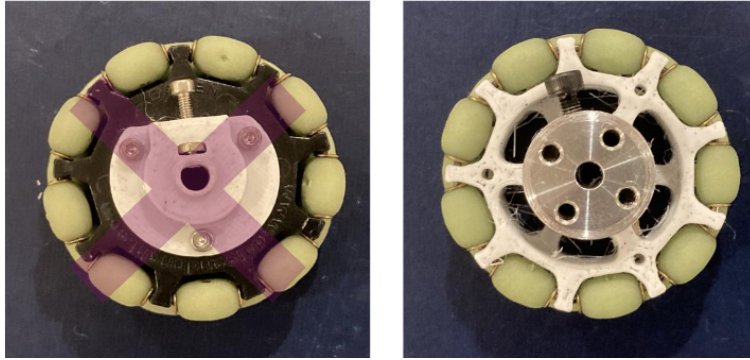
Left: old omniwheel design; Right: new omniwheel design
